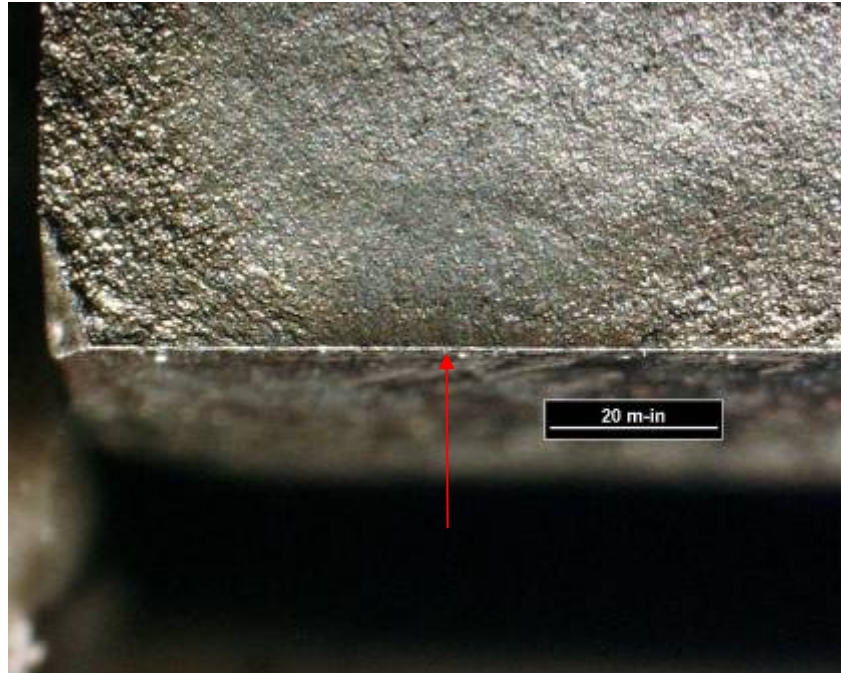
Primary origin, drive side of tooth 1, tooth fracture half.
